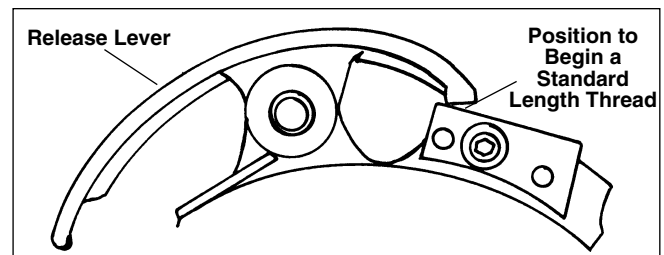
Adjust to Position Above with Die Head Cocked.
